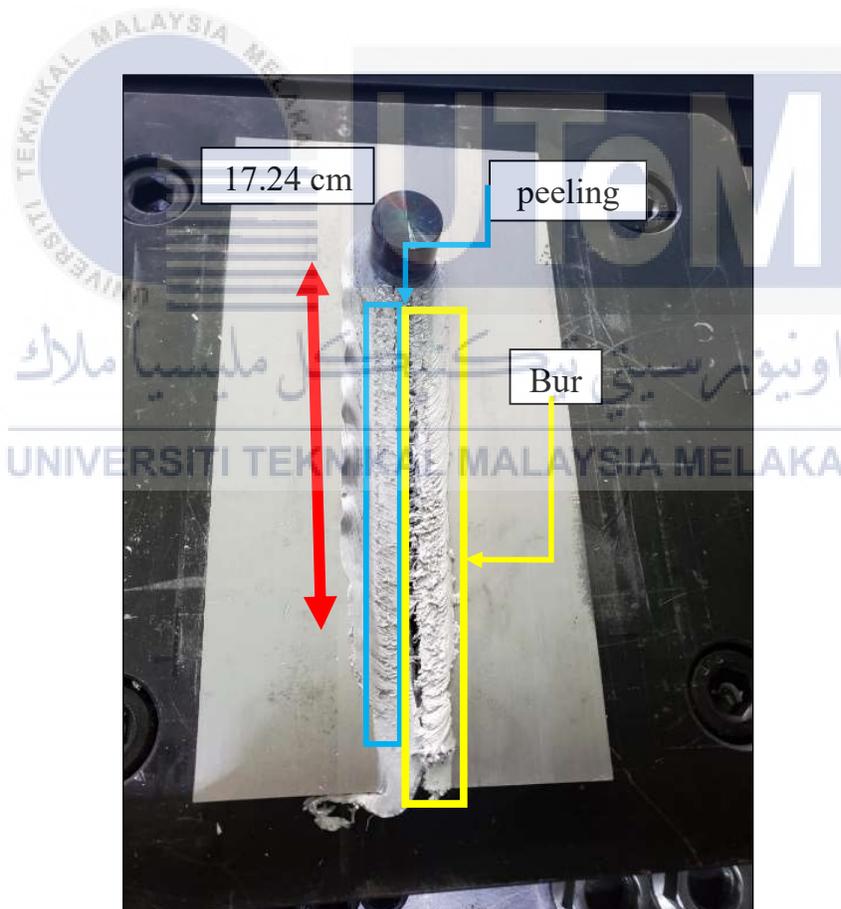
Failed fusion of aluminium alloy with tool failure.
